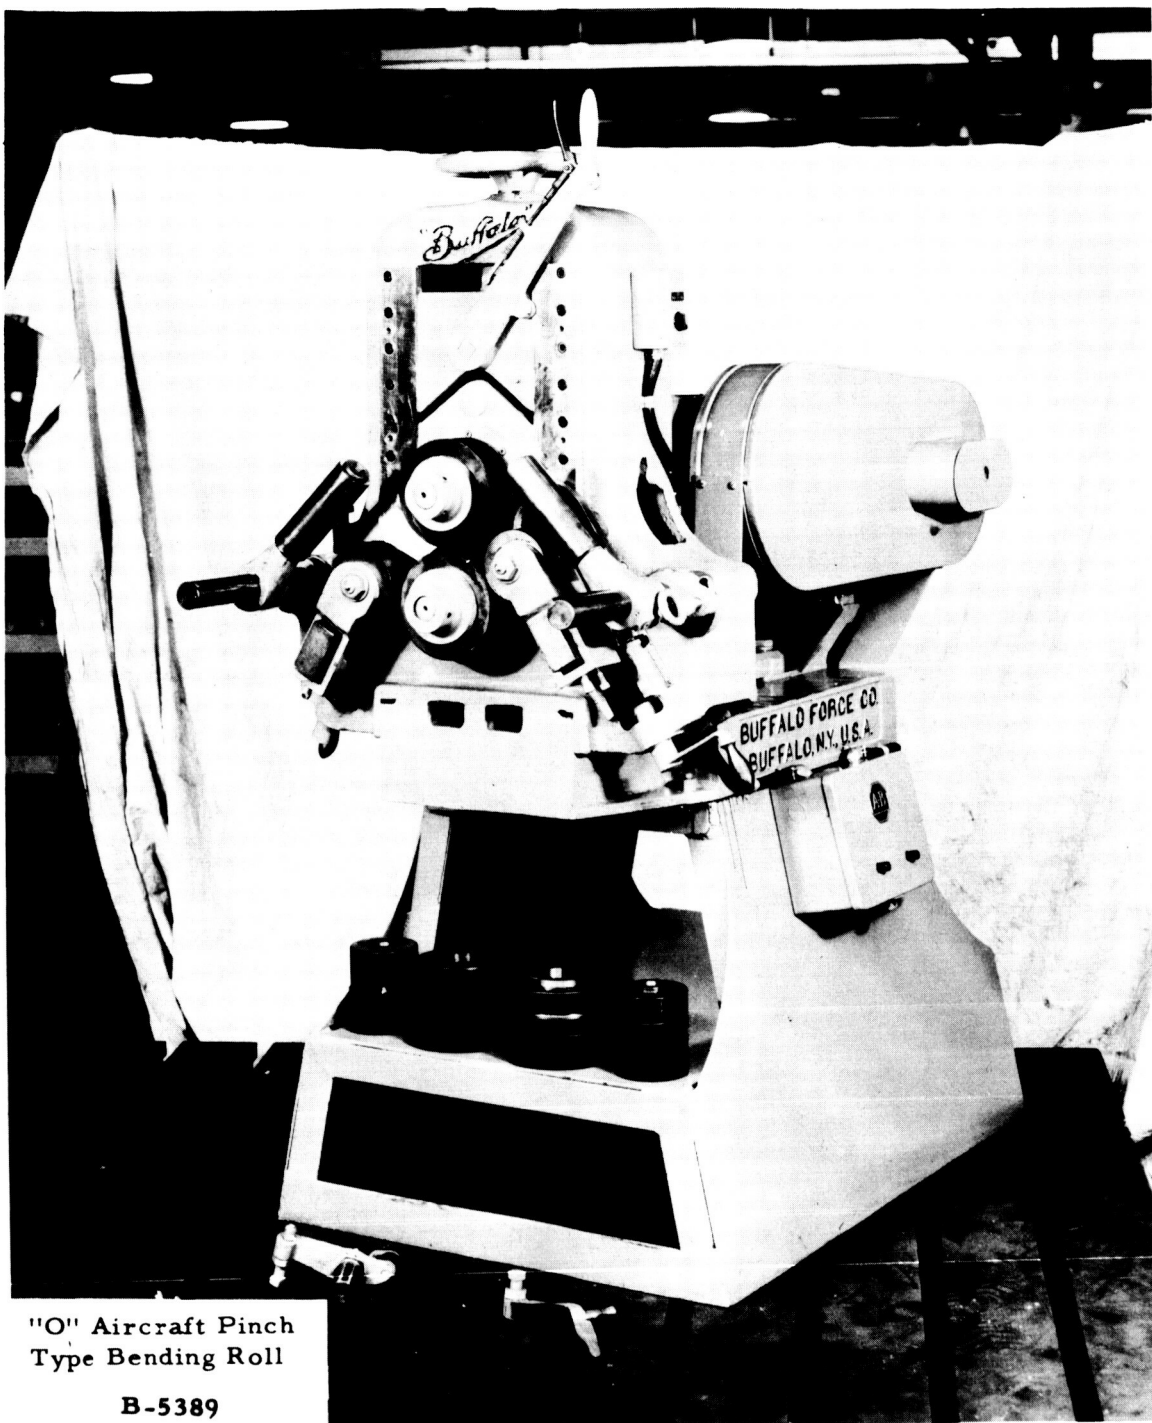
THREE-ROLL PYRAMID-TYPE ROLL-BENDING MACHINE
